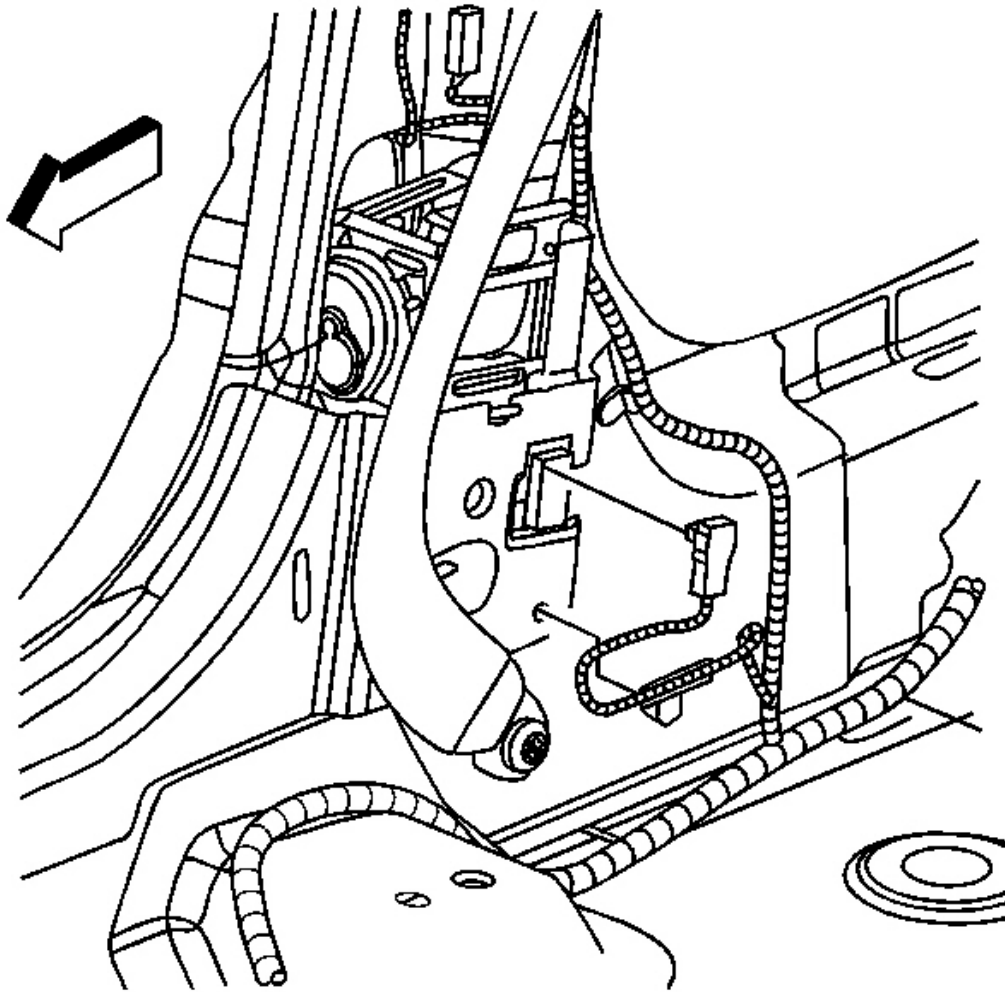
View Of Seat Belt Pretensioner Connector And Wiring Harness Routing
